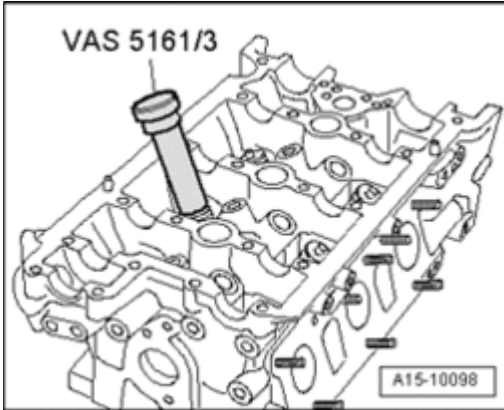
Placing Drift VAS 5161/3 On Valve Spring Plate And Loosening Stuck Valve Keepers Using Plastic Hammer
